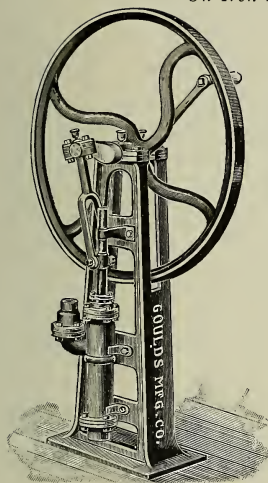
, Single-Acting Force Pump, has strong cast iron frame, heavy balance wheel, with crank on end of shaft for hand use, iron cylinder, check valve on discharge, suction and discharge fitted for iron pipe. Can be used where water is not more than 25 feet below Pump.
